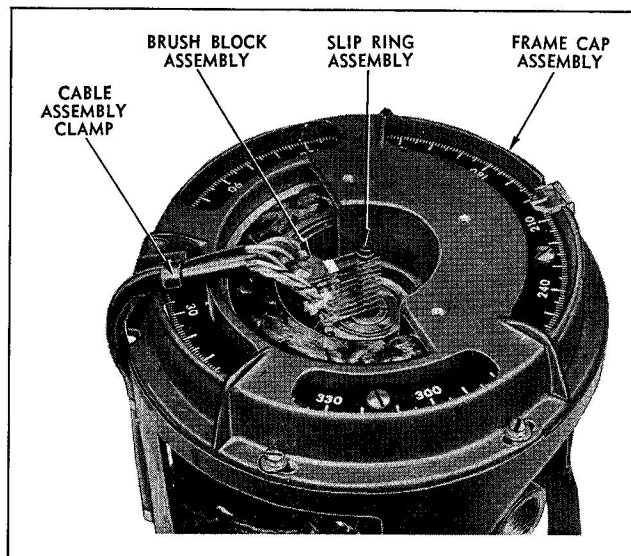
Close-Up of Slip Ring Assembly And Frame Cap
